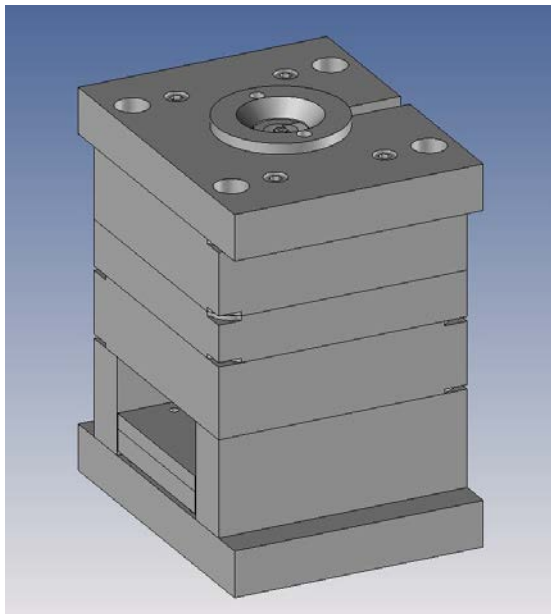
INJECTION MOULD FOR THE CAXMAN GIFT
